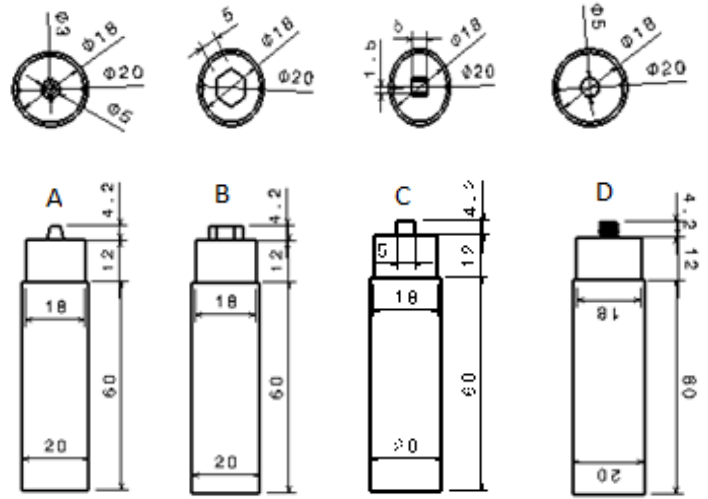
Tool Dimensions a) Conical Pin, b) hexagonal Pin, c) Trapezoidal Pin, d) cylindrical Threaded Pin
